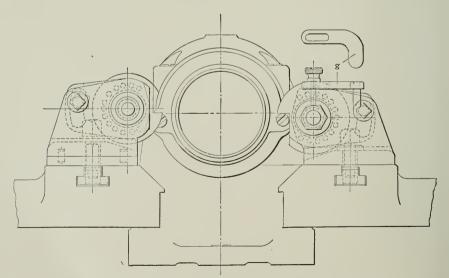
Adjustable Tool Posts for Circular Forming Tools
